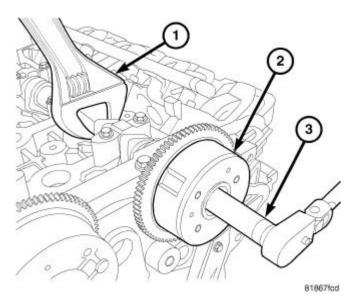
Removing & Installing Camshaft Phaser Courtesy of CHRYSLER GROUP, LLC
